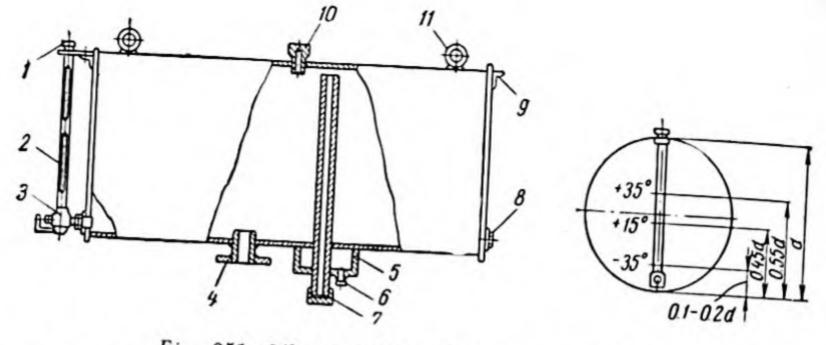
Oil conservator of a power transformer: 1—oil-gauge cap; 2—oil-gauge glass; 3—oil-gauge body; 4—connection pipe outlet; 5—sludge sump; 6—sump drain plug; 7—breather plug; 8—plug; 9—angle-iron part; 10—oil-filling hole plug; 11—lifting rings
